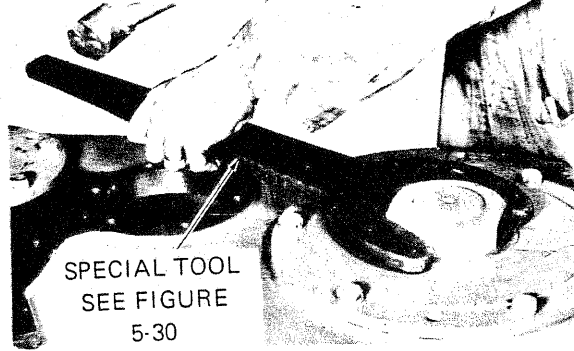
REMOVAL OF INTERMEDIATE SHAFT ASSEMBLY
